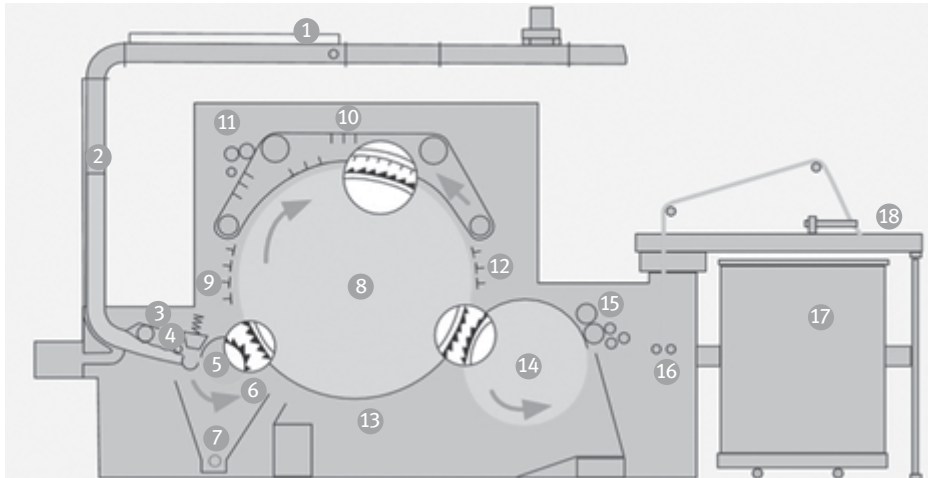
Material flow through chute feed card (1) Conveying duct, (2) Feed chute, (3) Feed Roller, (4) Card Feed, (5) Taker-In, (6) Knife Grid, (7) Suction duct, (8) Cylinder, (9) Front Carding Segment, (10) Flats, (11) Cleaning Unit, (12) Post carding segment, (13) Cylinder Grid, (14) Doffer, (15) Stripping Device, (16) Calender Roller, (17) Can, (18) Coiler.
